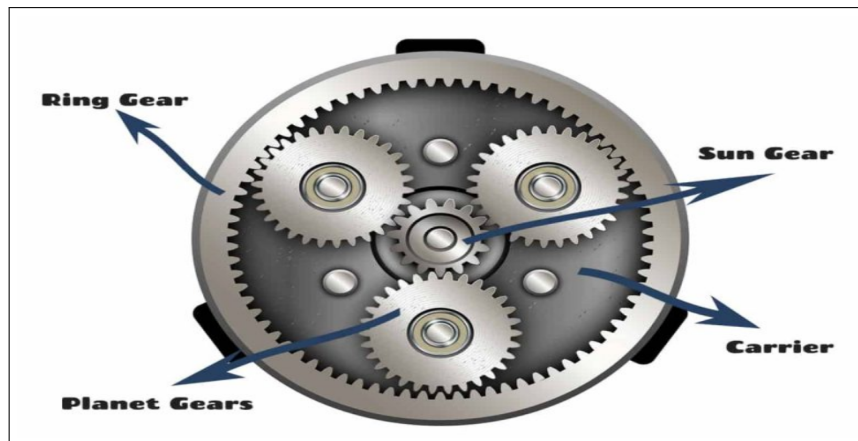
Placeholder – Diagram of a Planetary Gear Motor showing sun gear, planet gears, and ring gear arrangement.
